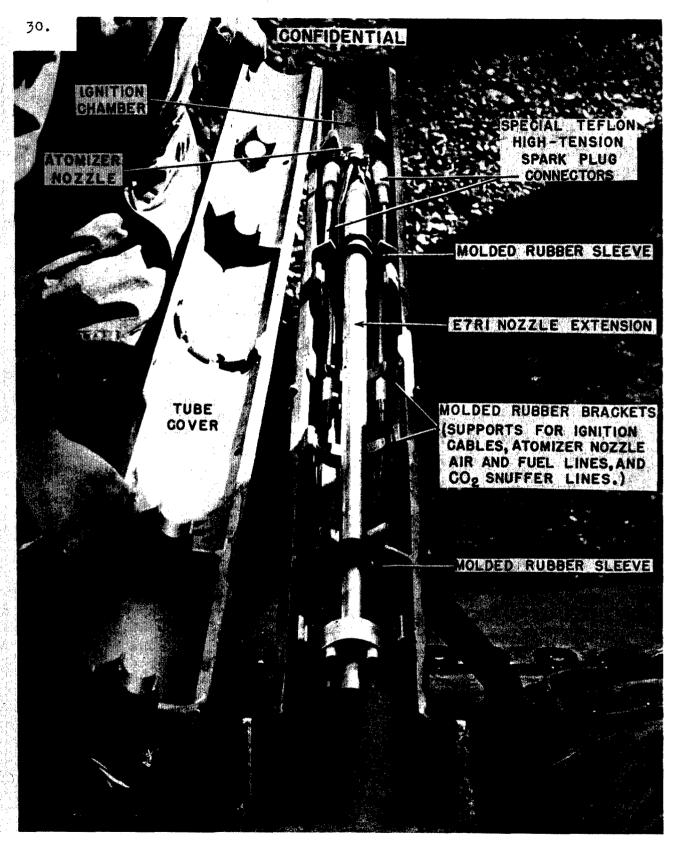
75 M.M. DUMMY GUN TUBE INSTALLATION CONFIDENTIAL
